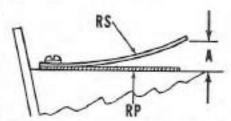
Cross sectional view of reedtype inlet valve. Reed petal (RP) should make full contact with plate, Reed stop (RS) adjustment should not be changed, Clearance (A) should be 1/4 inch.
